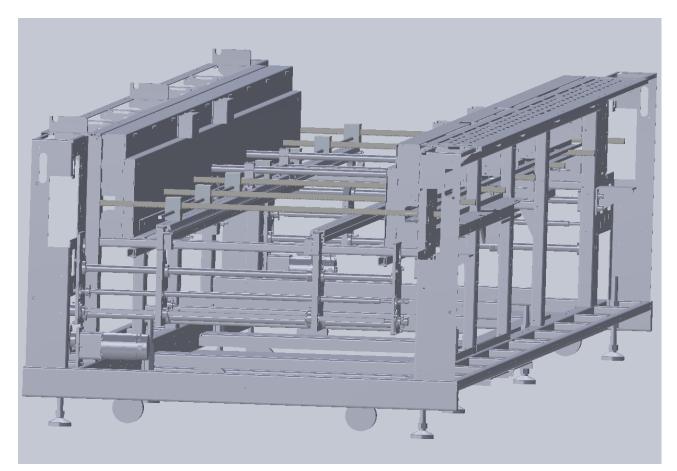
First isometric view of oven with rack modules implemented, from front right viewing position. Lead screw modules would not occur in the final design, along with the lead screw adjustment seen at the front of the oven.
